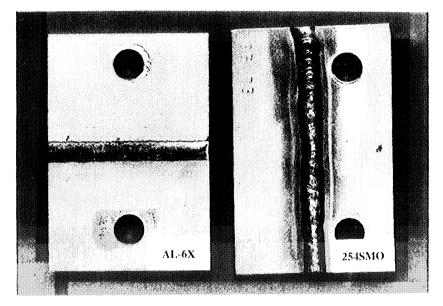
Typical coupons of 6% Mo Stainless Steels after exposure in a chlorine-dioxide-stage washer. Weld metal pitting on the autogenous (no filler) weld (*left*) was avoided when Alloy 625-type enriched filler was used (*right*)
